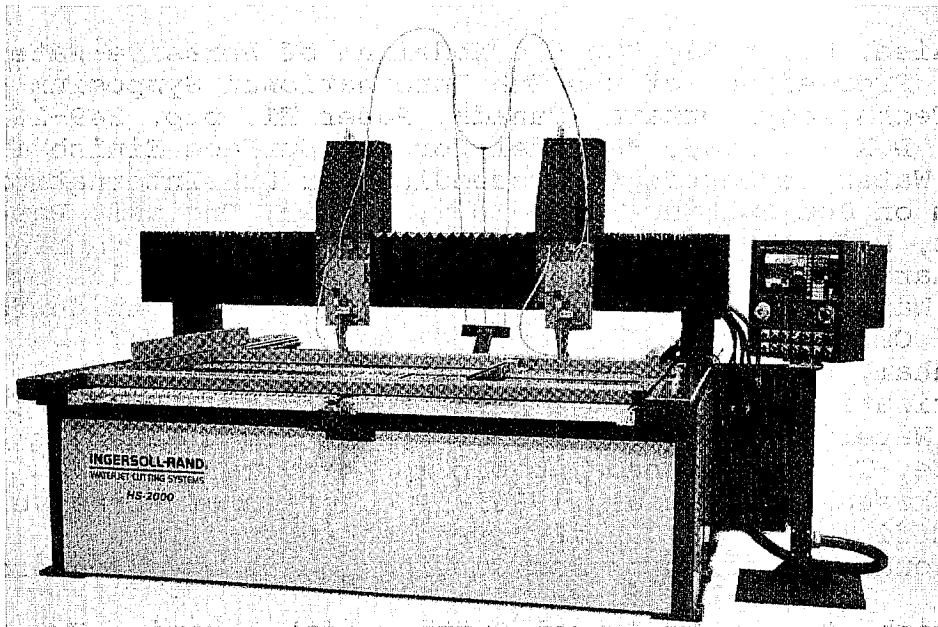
Ingersoll-Rand HS-2000 CNC Cutting Station and Hydroabrasive Nozzle Assembly
